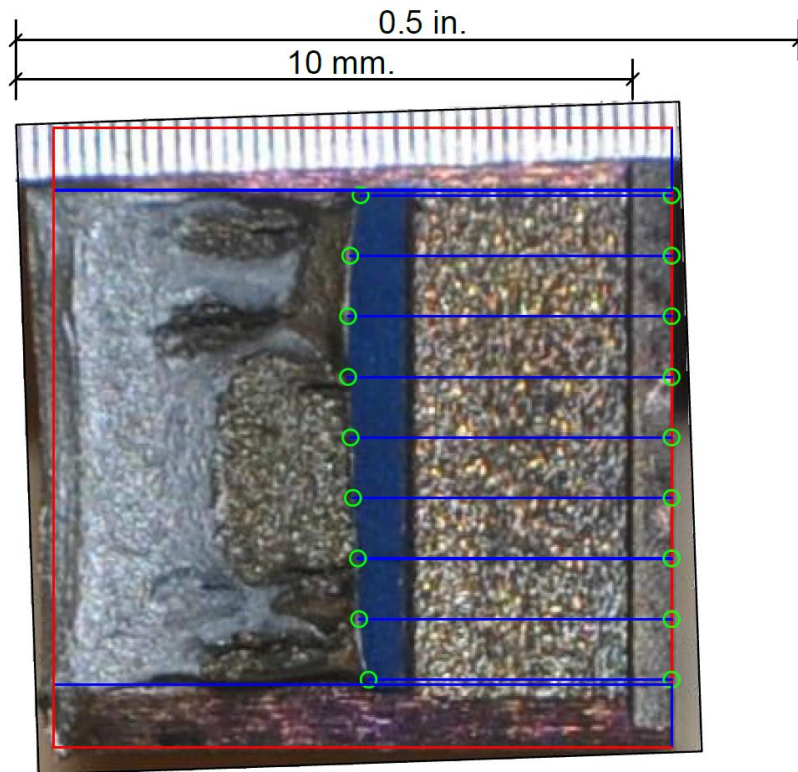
Specimen I13' Fracture Surface
